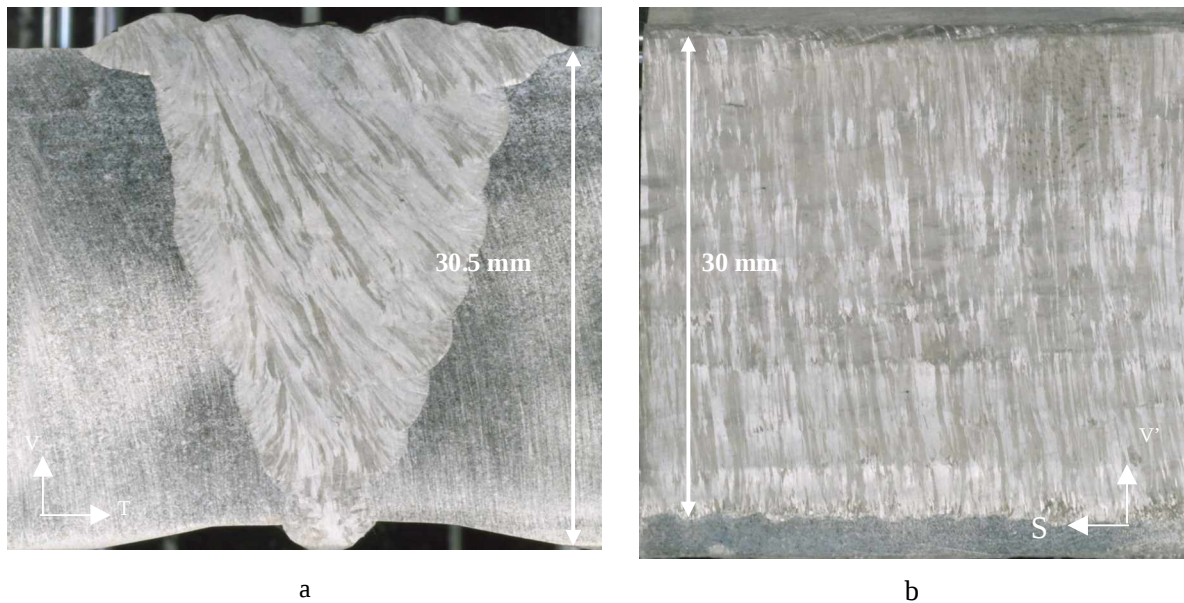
Transverse and longitudinal sections of a horizontal-vertical weld
